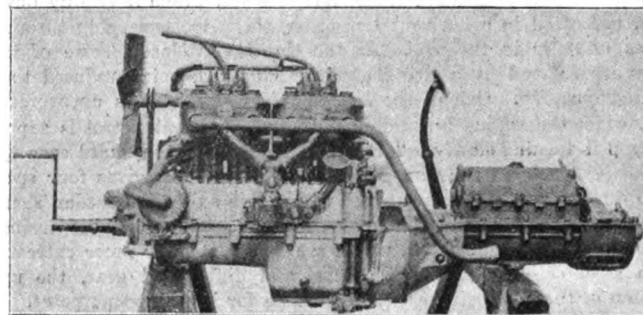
View of Engine and Gear-Box of Adler 12-h.p. Car.
